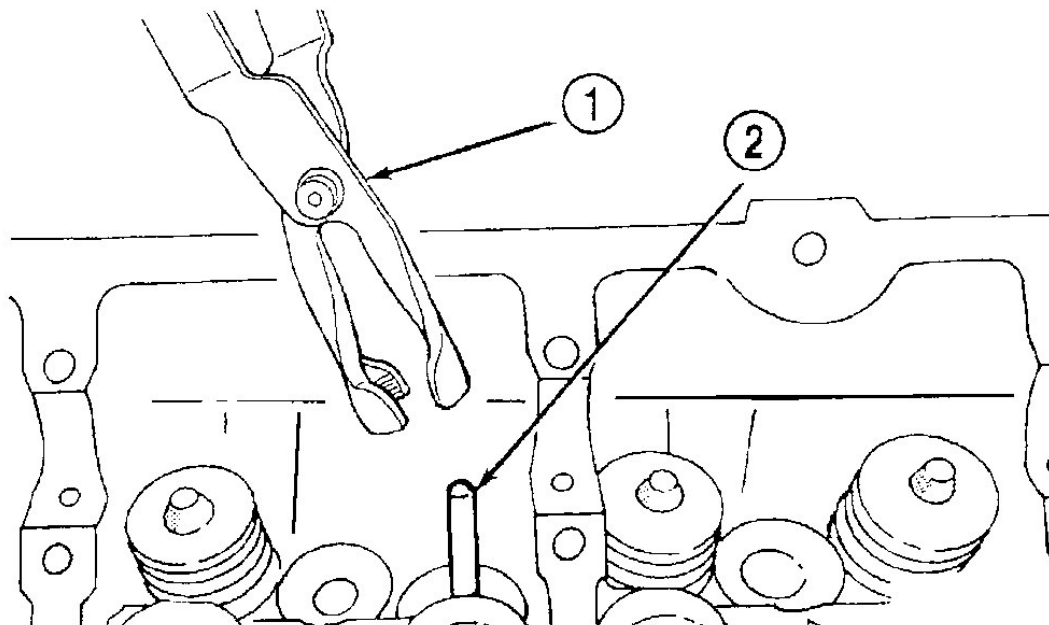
Installing Valve Stem Seal/Valve Spring Seat
